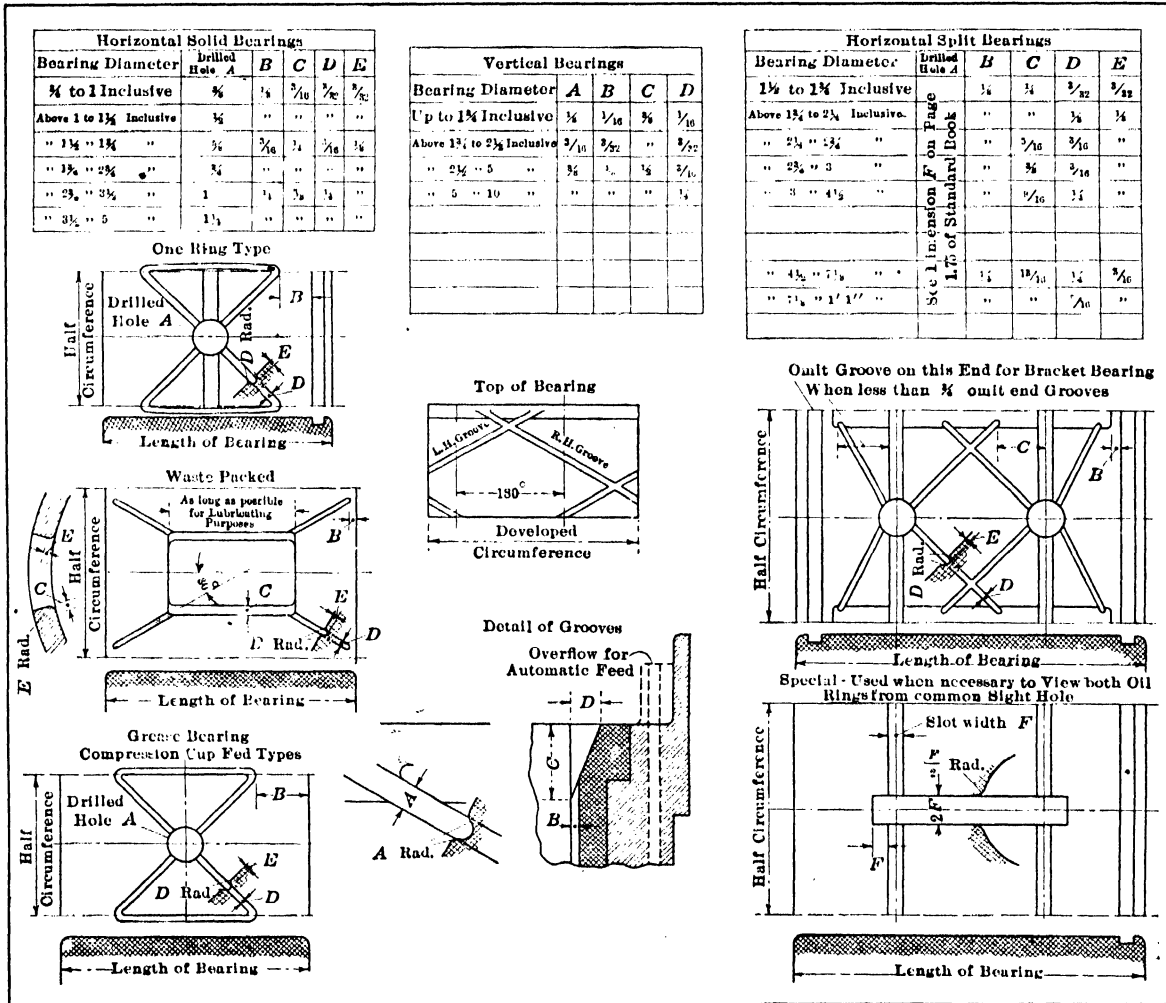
Westinghouse practice for oil grooves in bearings.
